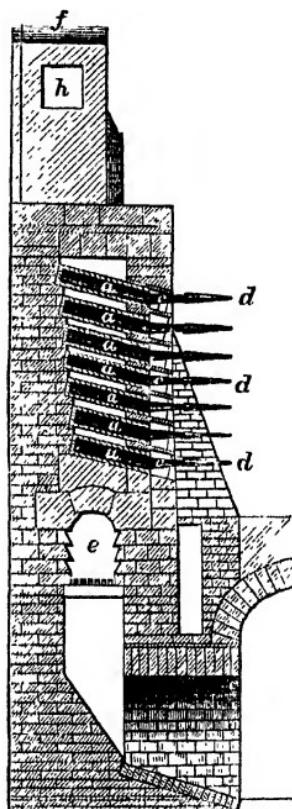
TRANSVERSE VERTICAL SECTION OF BELGIAN ZINC FURNACE.
